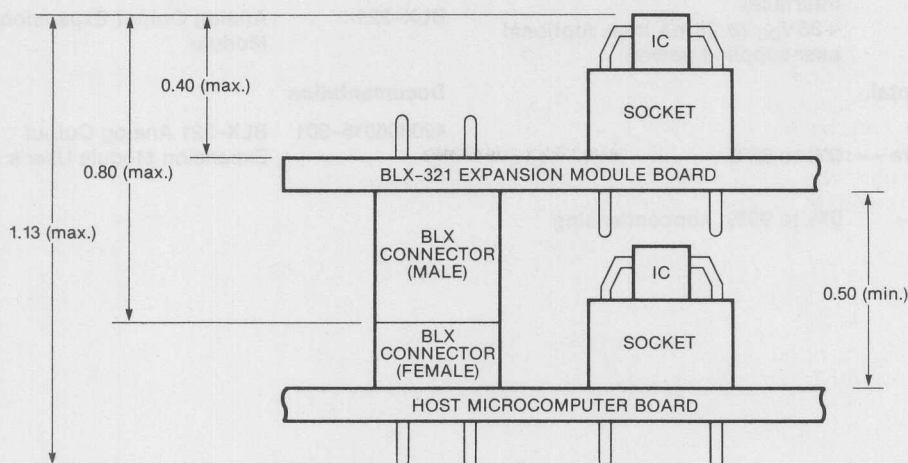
BLX-321 Expansion Module Mounting Clearances (inches)
